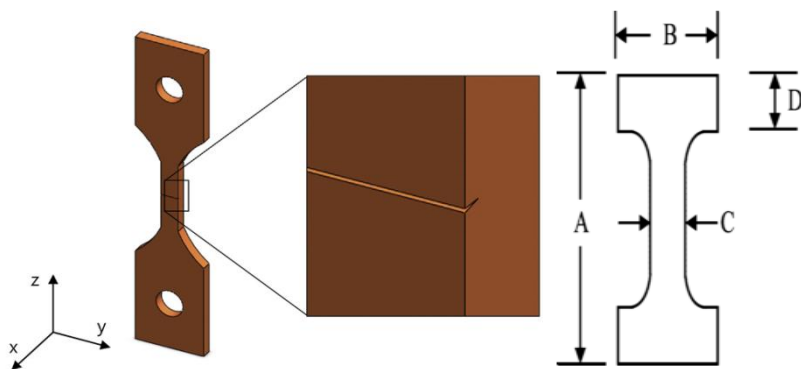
Specimen dimensions used during modified bending test.¹³
